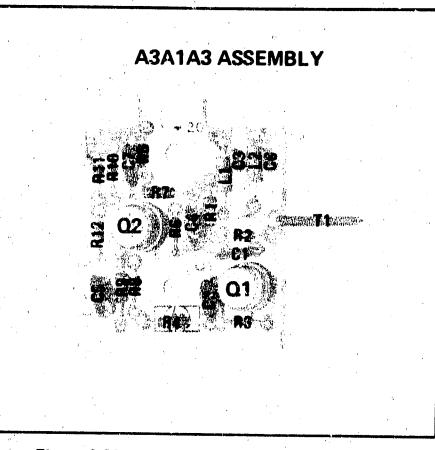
A3A1A3 Counter Buffer Amplifier Board Assembly
